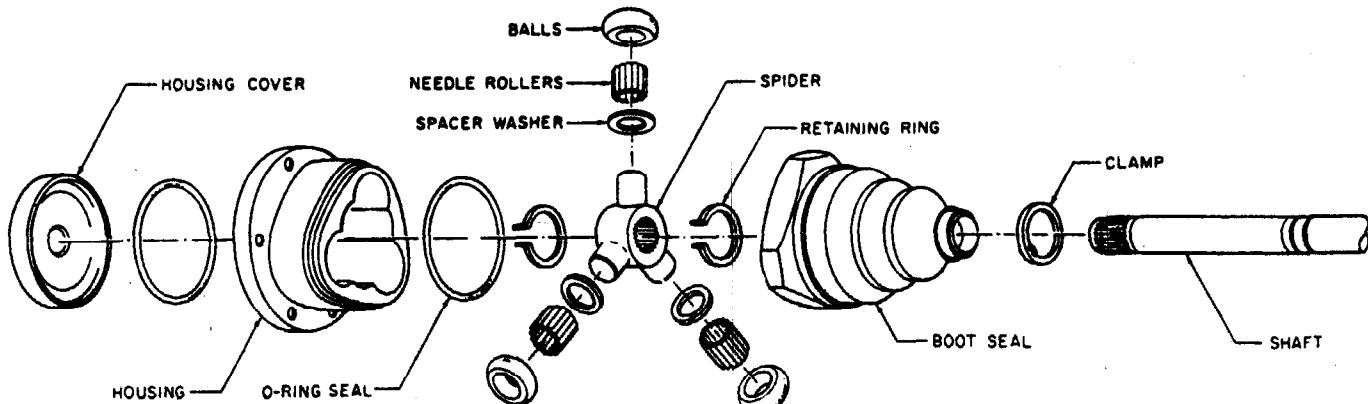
TRIPOT UNIVERSAL JOINT ( EXPLODED VIEW )
